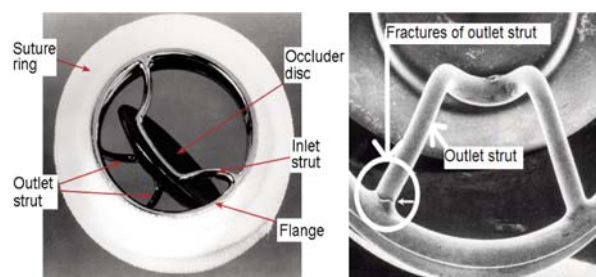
Typical design of the BSCC heart valve with fracture at the outlet strut [1]
